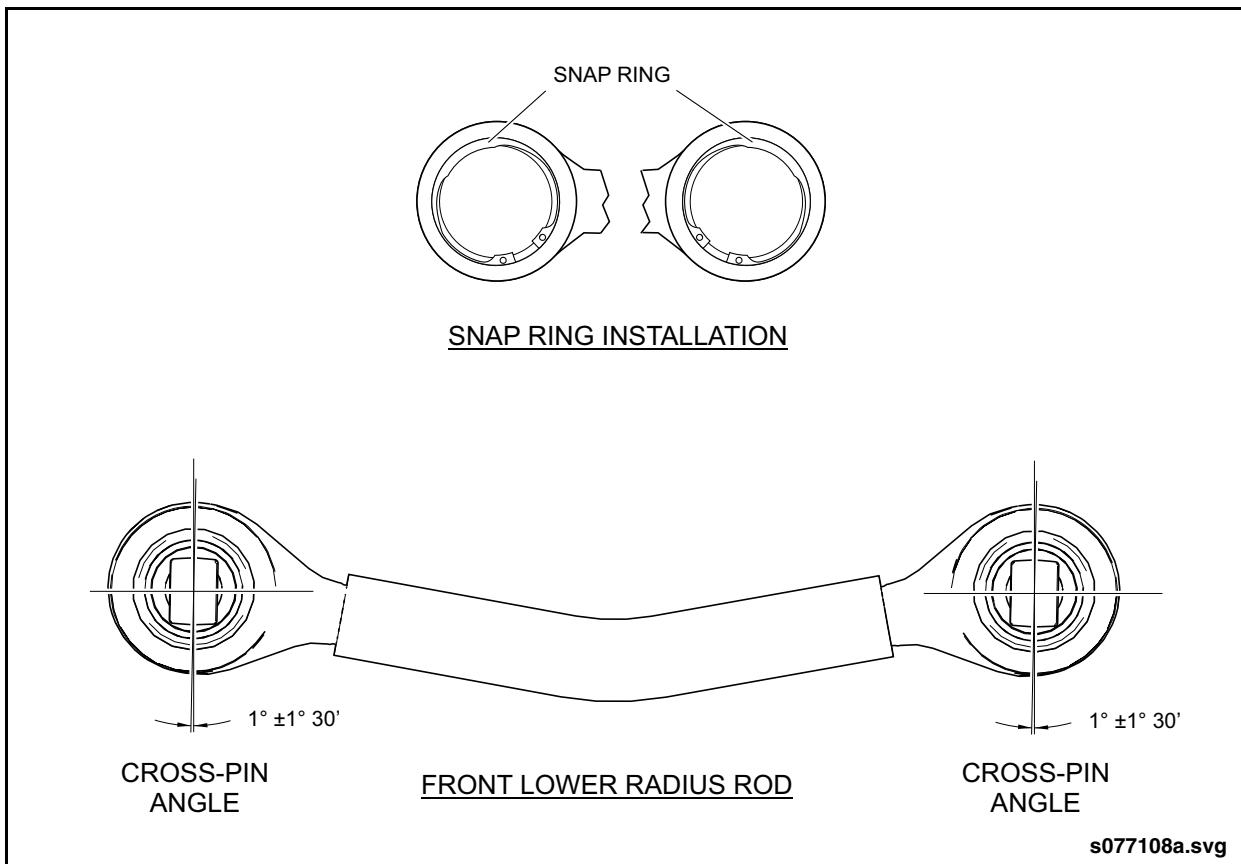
Front Lower Radius Rod Bushing Replacement
